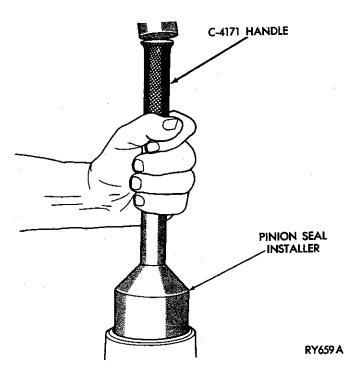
Drive Pinion Gear Shaft Seal Installation
